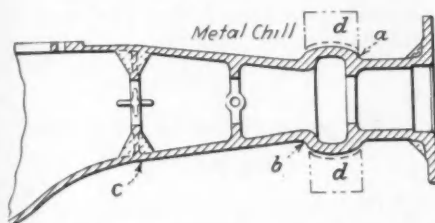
CAST-STEEL AXLE-HOUSING WHICH CRACKED
